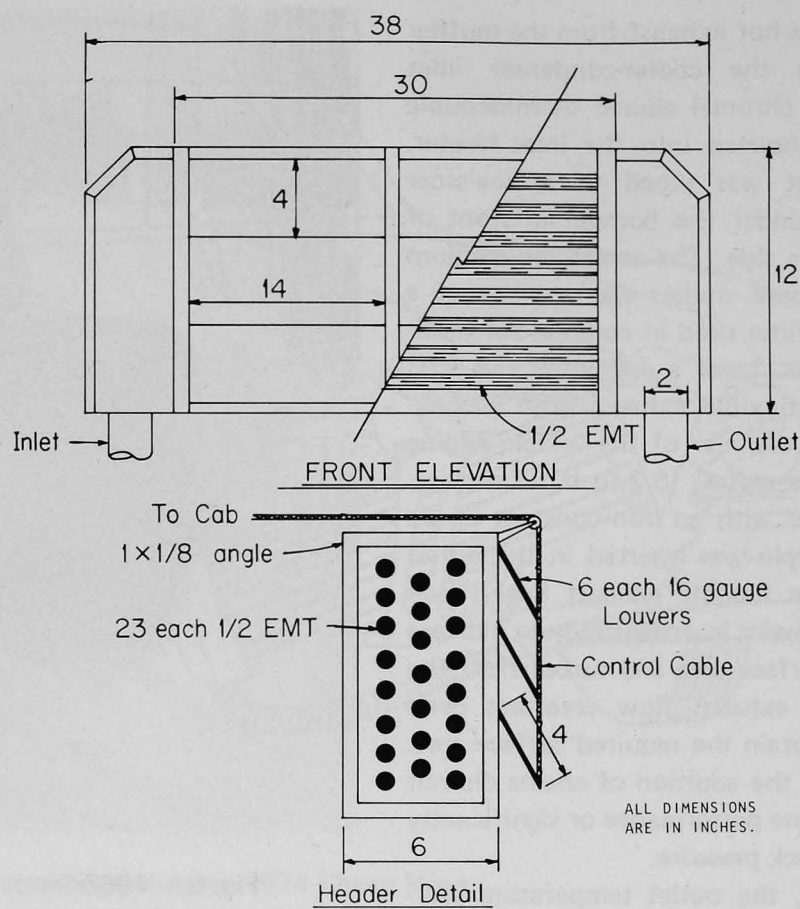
EMT cooler-condenser fabricated for 1968 International Scout.
